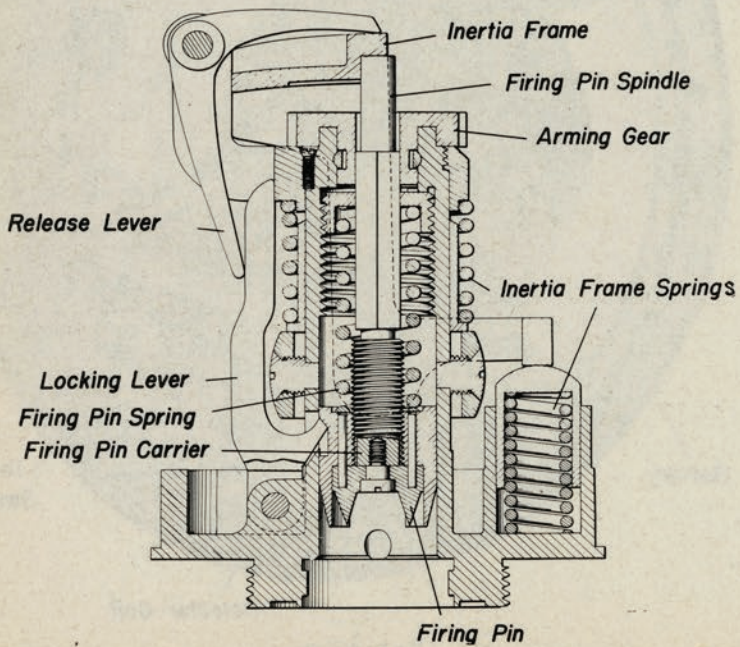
Italian Standard Exploder, Unarmed Position, Sectional View
